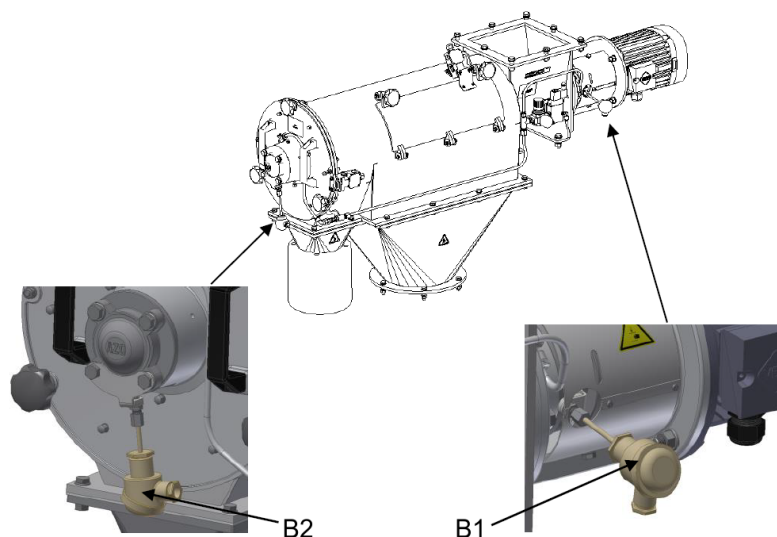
Bearing temperature control at both bearing points on the rotor (example of the screener E650 B1)
